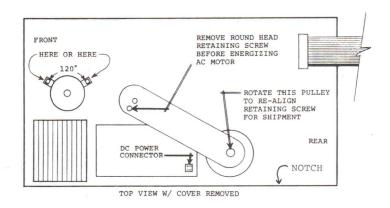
STEPPER LOCK & SET SCREW PLACEMENT
